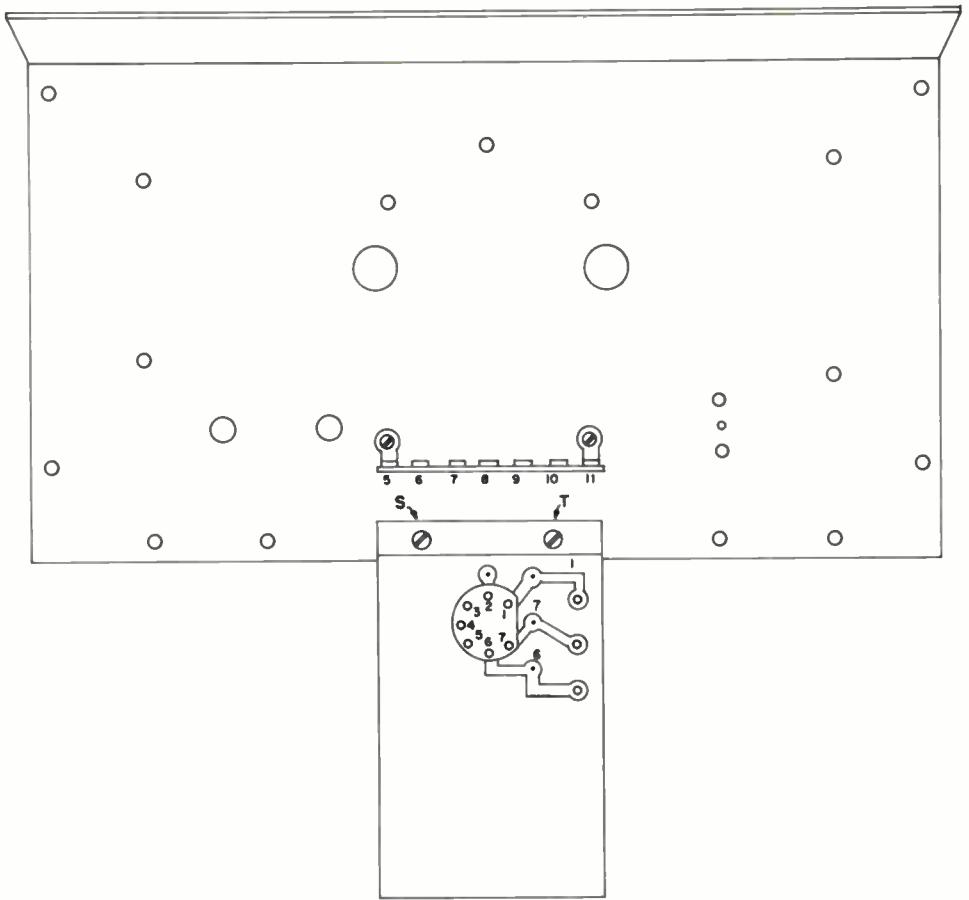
Mounting the circuit board on the experimental chassis.
